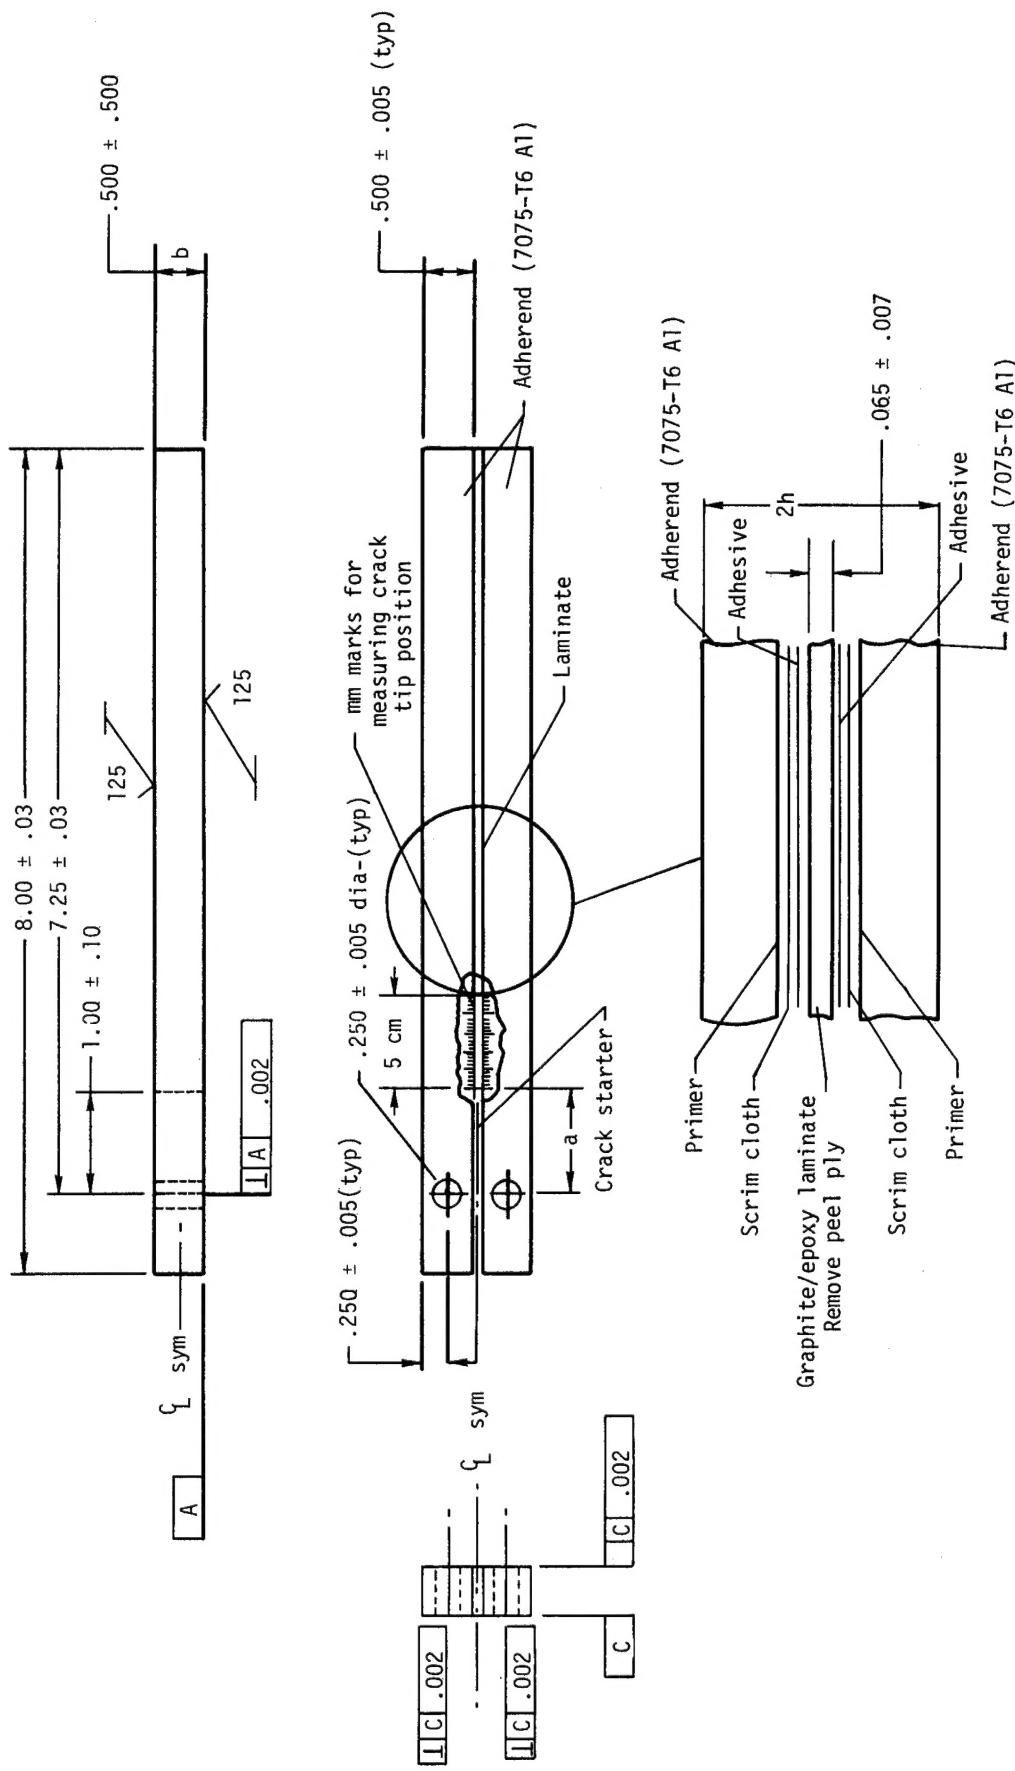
Double cantilevered beam test specimen. Dimensions are in inches.
